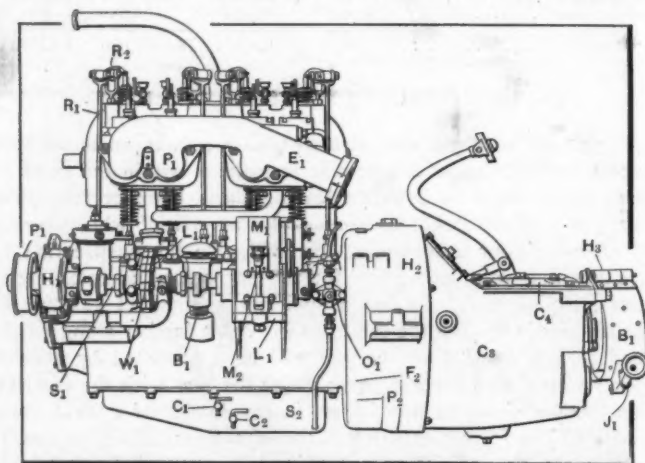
Left-hand side of Model "30" motor, showing a unit type of power plant with the magneto and water pump driven by a common shaft
